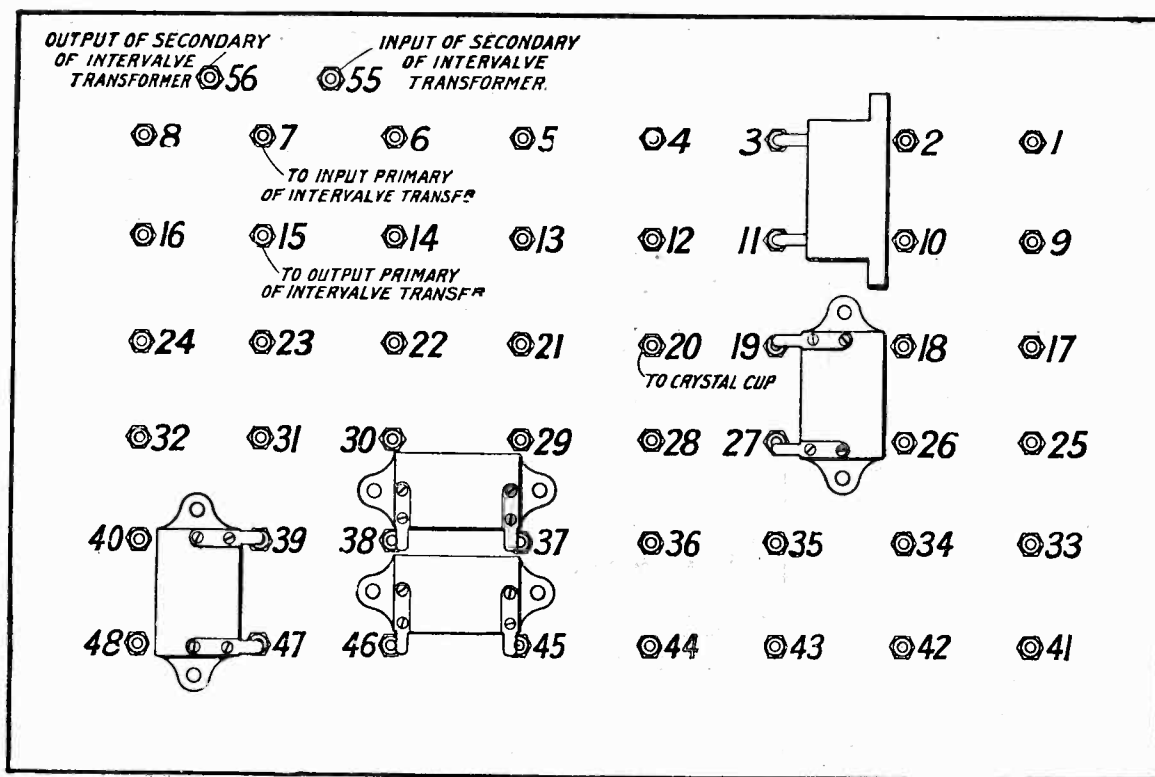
Reverse of terminal board, showing method of attaching fixed condensers.
